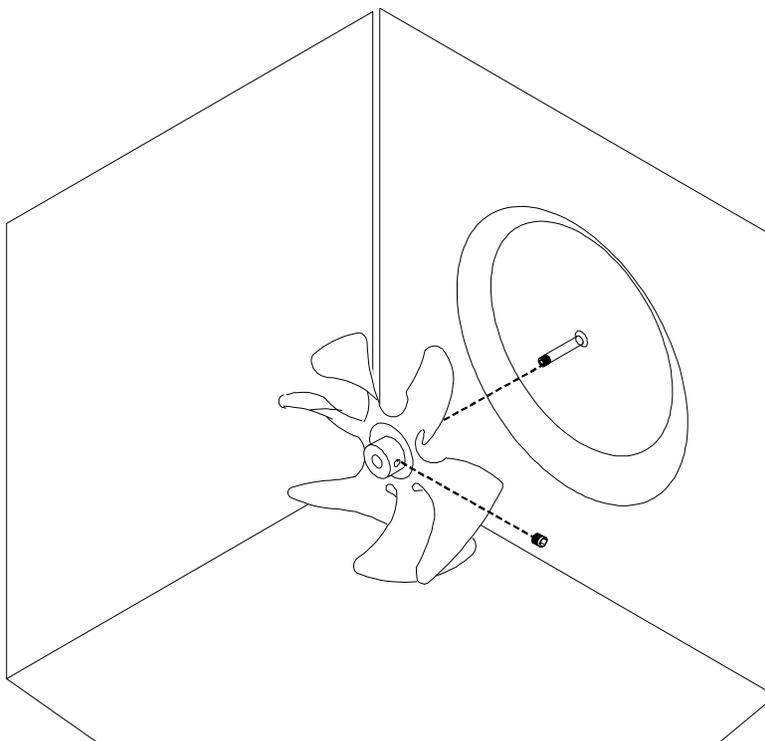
Removing the set screw on the oven fan shaft (inside oven)
